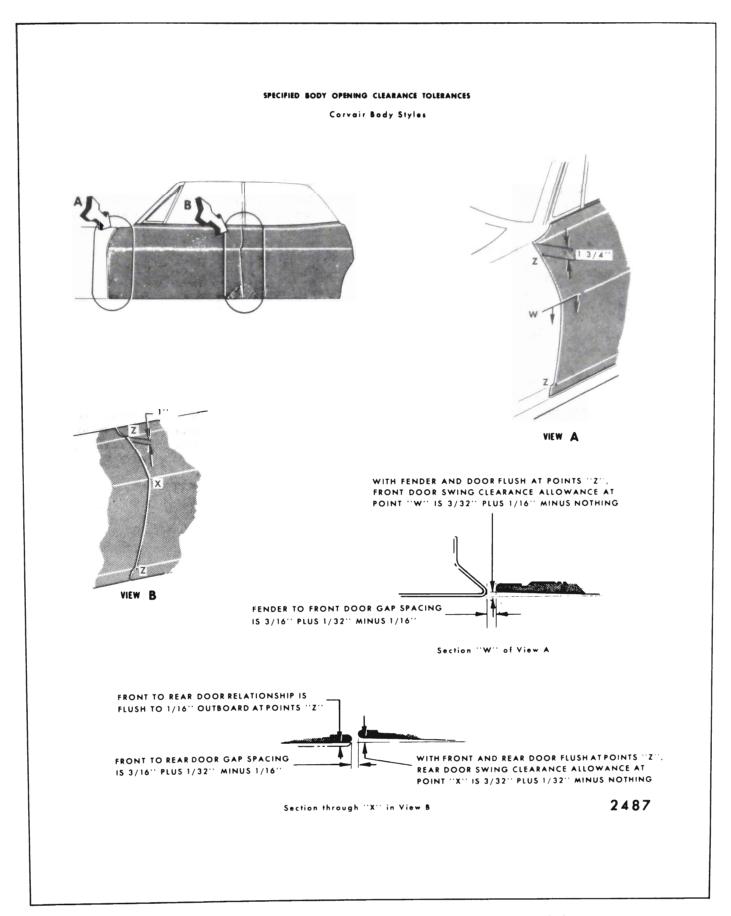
Specified Body Opening Clearance Tolerances - Corvair Styles
